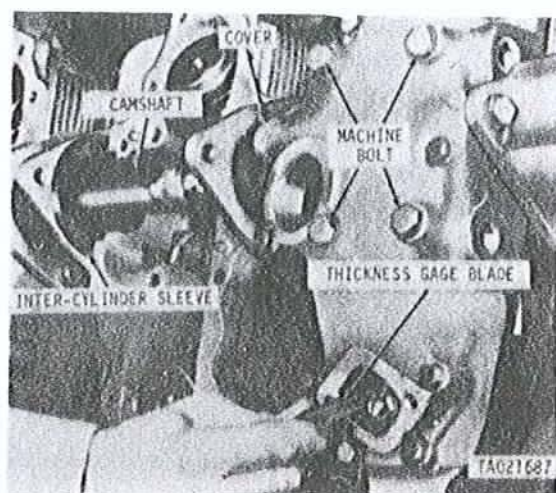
Installing valve rocker arm cover and adjusting intake valve clearance (cylinder No. 6R).
